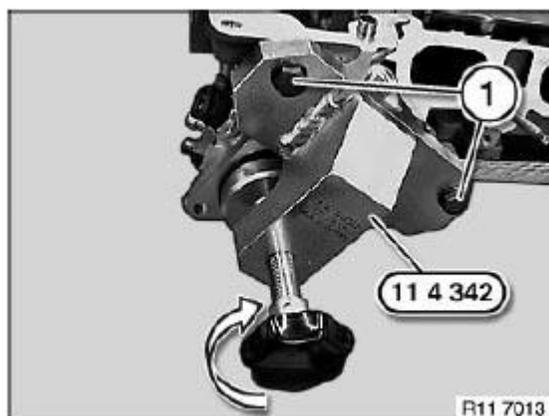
Identifying Special Tool (11 4 342) With Mounting Bolts
